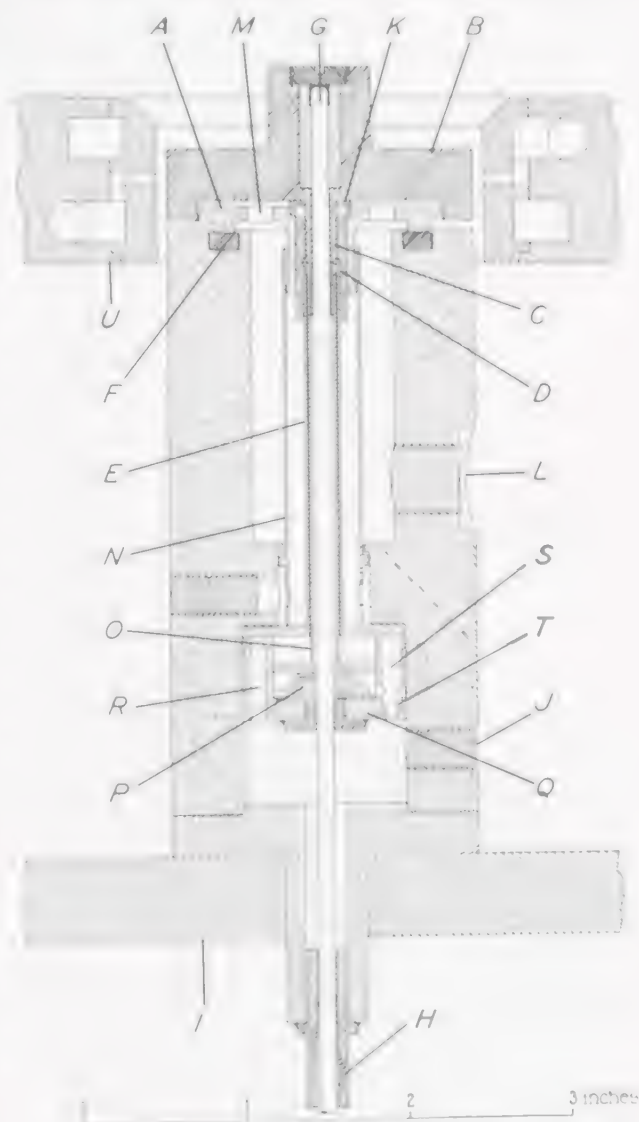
Vertical cross-sectional drawing of driving mechanism of vacuum-type centrifuge. (A) Air bearing disk; (B) Steel turbine; (C) Stem of steel turbine; (D, E) Bronze bushing of turbine; (F) Neoprene rest for air bearing disk; (G) Drive shaft; (H) Bronze bushing for drive shaft; (I) Brass support plate; (J) Oil inlet; (K) Bronze rest for turbine; (L, M) Air inlet; (N) Oil outlet; (O to T) Damping arrangement; (O) Metal tube; (P) Steel spring; (Q) Brass cylinder; (R) Oil outlet; (S) Oil inlet; (T) Steel ball oil valve; (U) Cross arm mounting. (Pickels, E. G., 1938, A new type of air bearing for air-driven high-speed centrifuges. *Review of Scientific Instruments*, 9, 358-364.)
